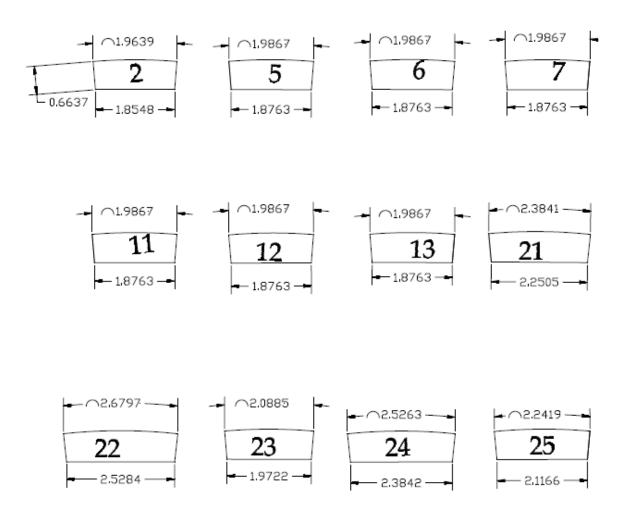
The Dimensions of the pieces of the annular ring (12 pieces with the smallest area).
